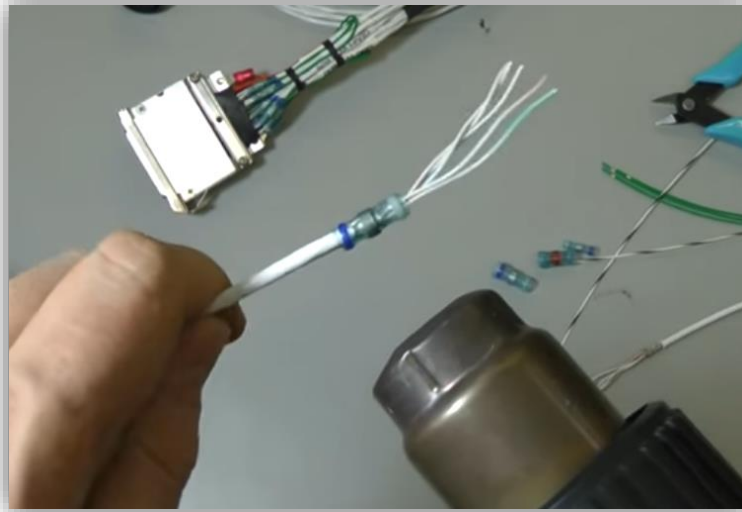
Solder Sleeve being heated to point where Meltable Ring must melt.
